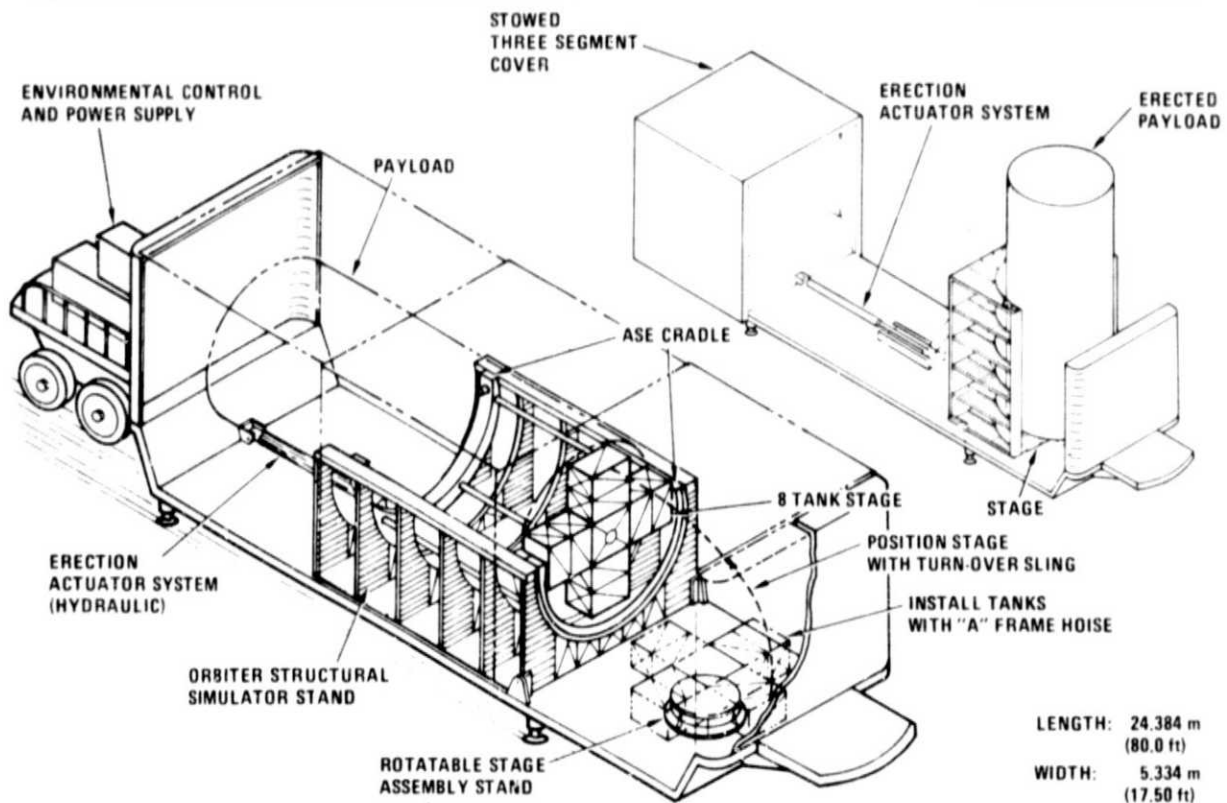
MOBILE FLAT BED ASSEMBLY
